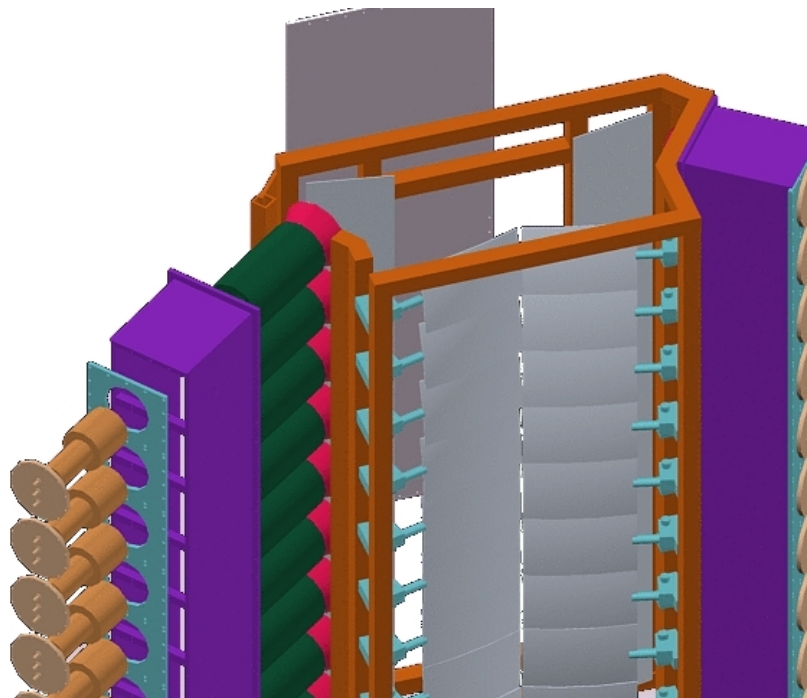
Exploded CAD assembly of the BigBite short gas Čerenkov detector.
